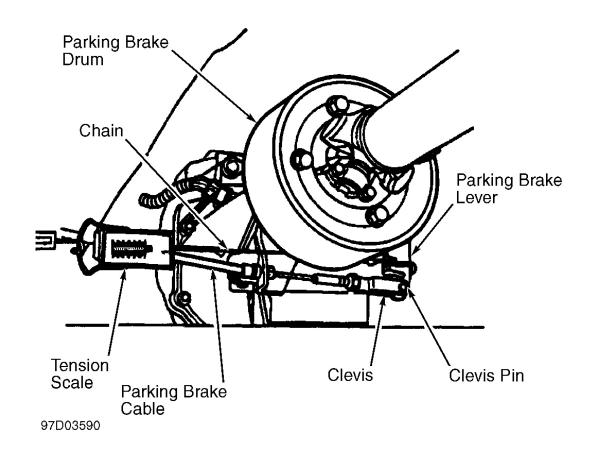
Identifying Drive Shaft Parking Brake Components (C/K Series) Courtesy of GENERAL MOTORS CORP.
